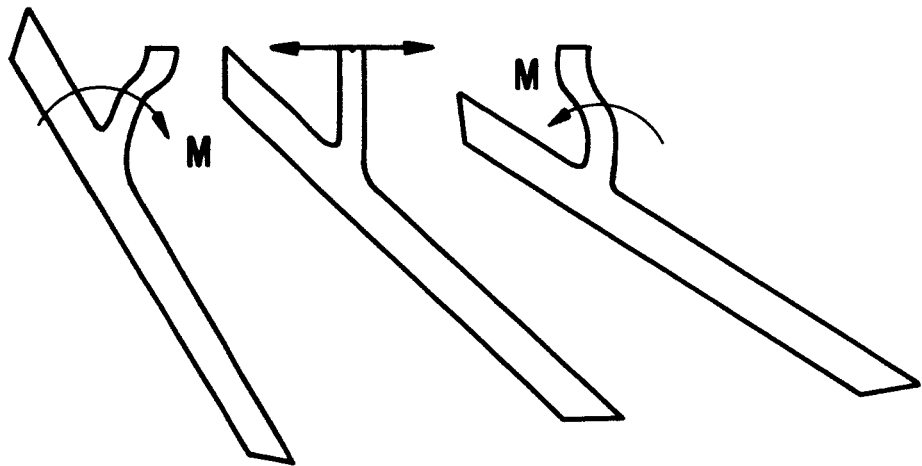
Illustration of Bearing Cone Motion with Rotation Caused by Flexure End Moment (M).
